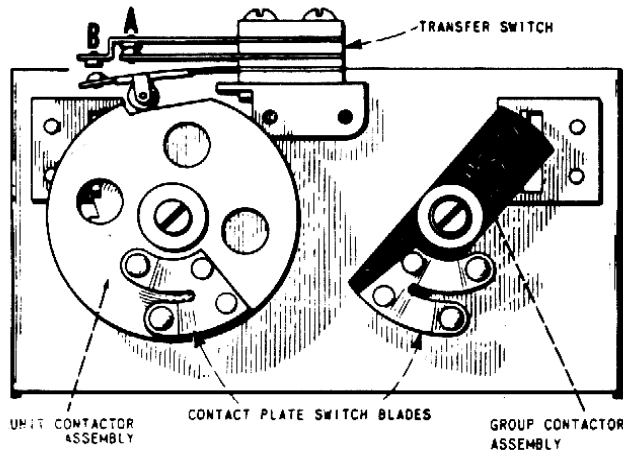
SIDE VIEW - TRANSFER SWITCH
